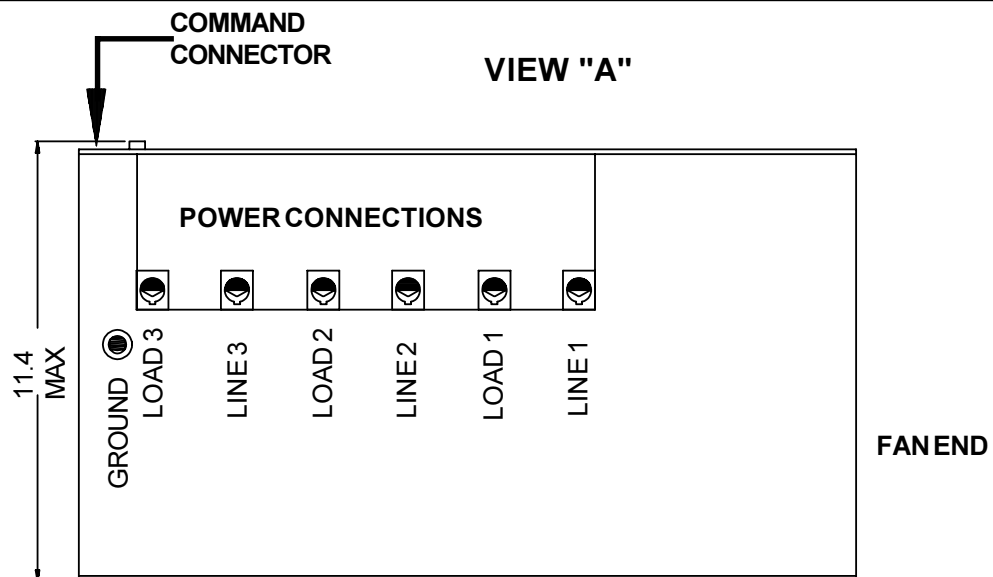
Left side view of 120 & 160 amp 3629B controller.
